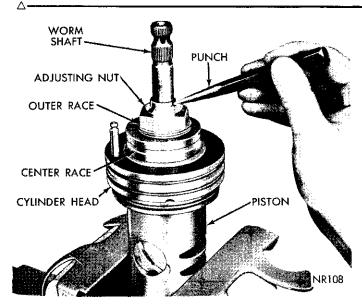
Staking Worm Shaft Bearing Adjusting Nut
